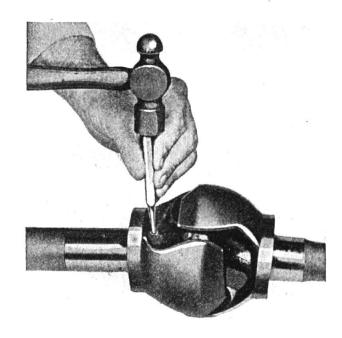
REMOVING RETAINER PIN (Bendix Joint)
